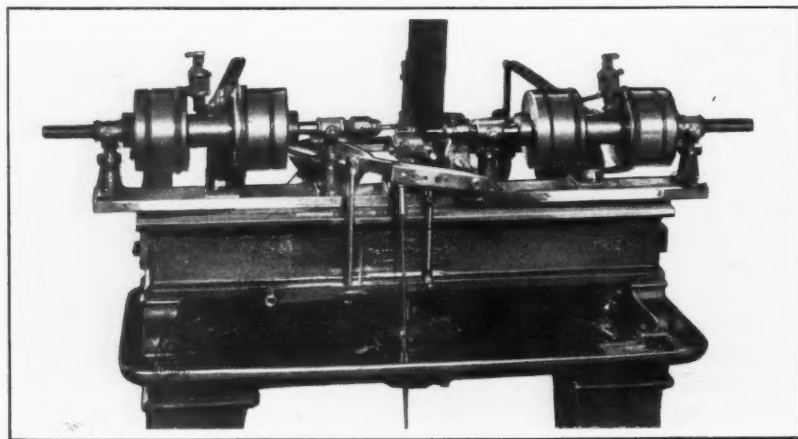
Mahan Floor-type Horizontal Drilling and Tapping Machine
